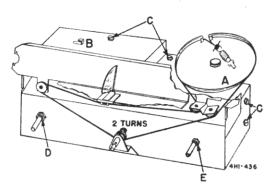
Radio Tuner Showing Chassis Cover and Dial Assembly.
